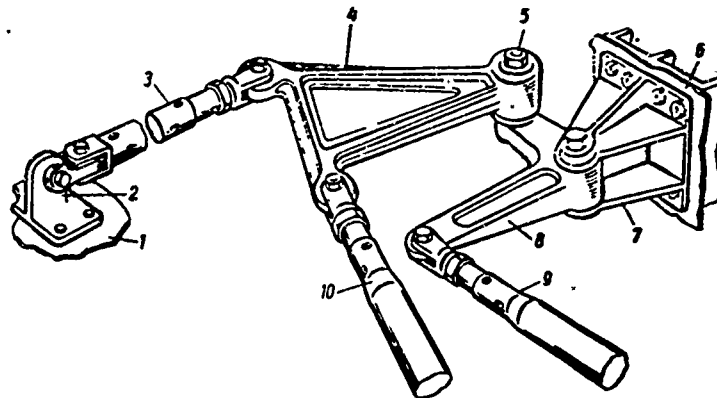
Aileron droop mechanism: 1 - aileron; 2 - single-arm aileron lever; 3 - steel aileron rod; 4 - aileron deflection actuator; 5 - attachment pin of the aileron deflection actuator; 6 - spar web; 7 - bracket; 8 - L-shaped aileron droop actuator with flap deflection; 9 - rod, which goes to the flap control; 10 - aileron control rod.
